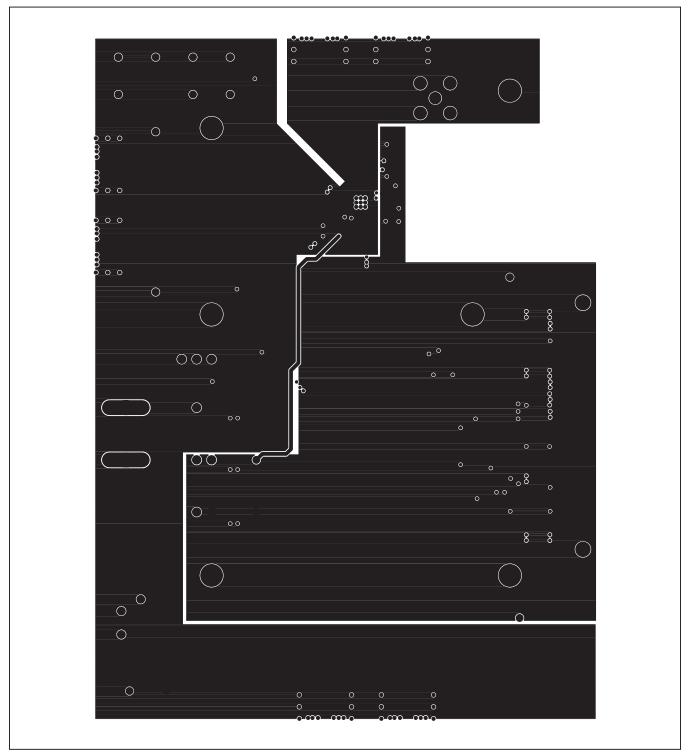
MAX3711 EV Kit PCB Layout—Power Plane
